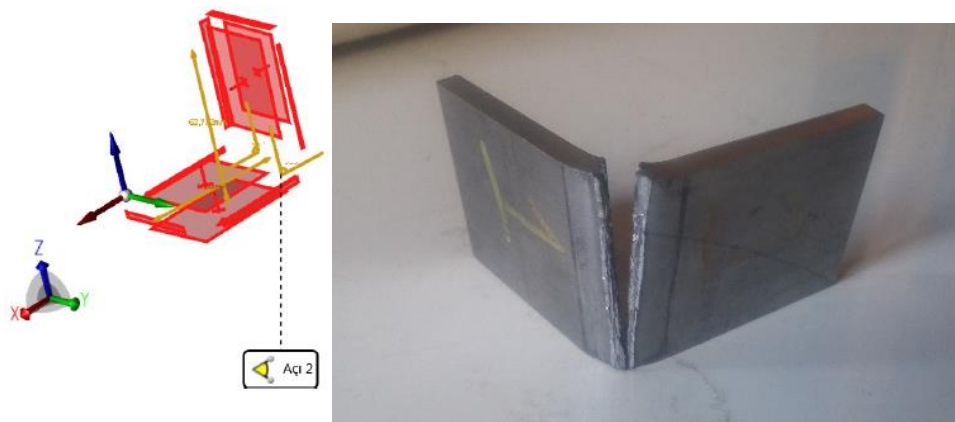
Illustrations of Formed Workpieces Measured by CMM and Cold Bent Workpiece.
